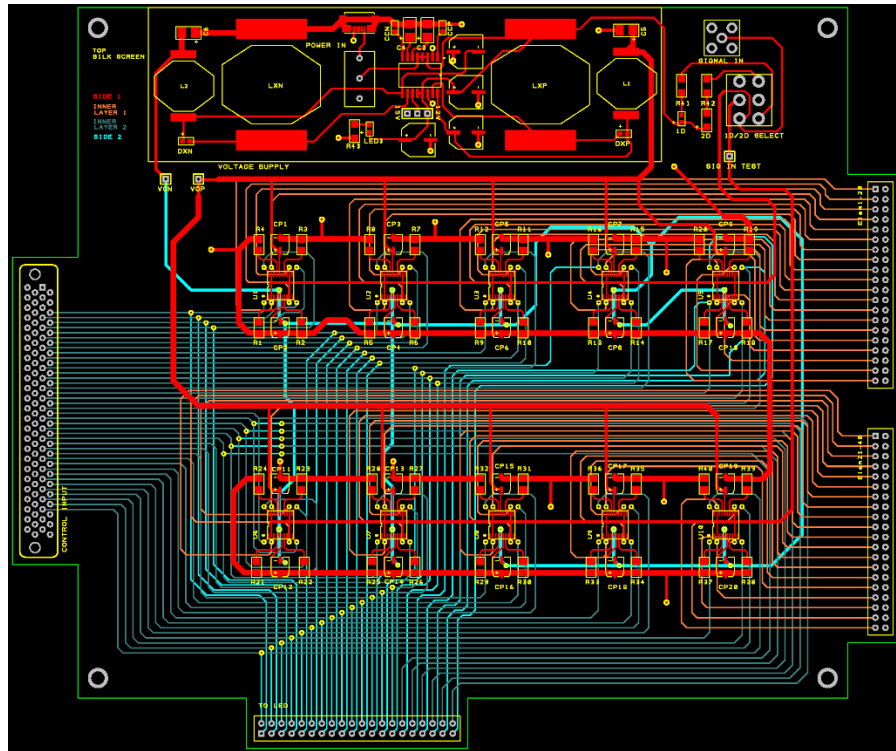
4-layer PCB stack-up layout demonstration of multiple PCB layers.
